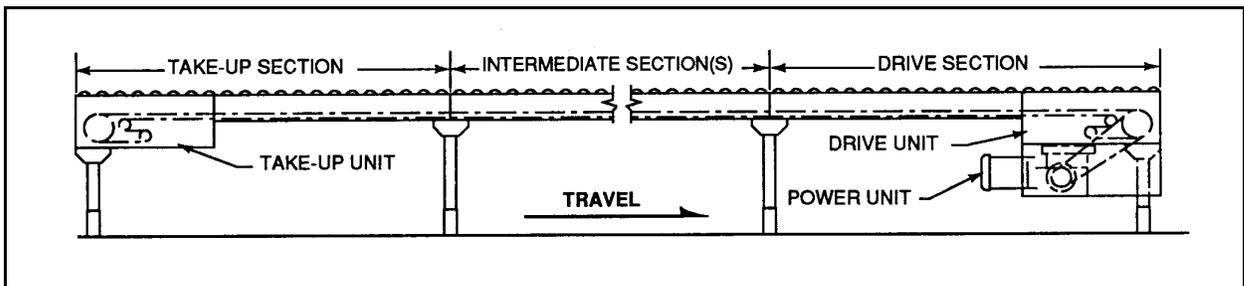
Style 1, T/C Conveyor with Discharge End Drive Unit
